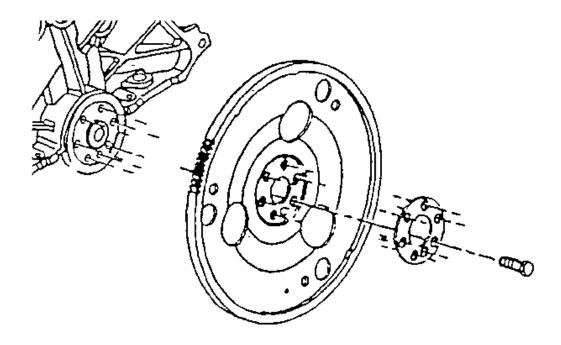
Identifying Engine Flywheel & Components Courtesy of GENERAL MOTORS CORP.
